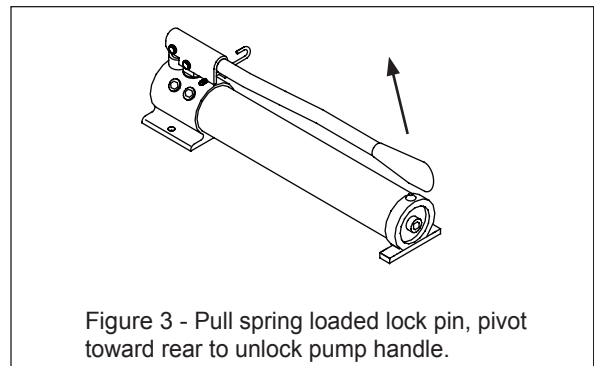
Pull spring loaded lock pin, pivot toward rear to unlock pump handle.
